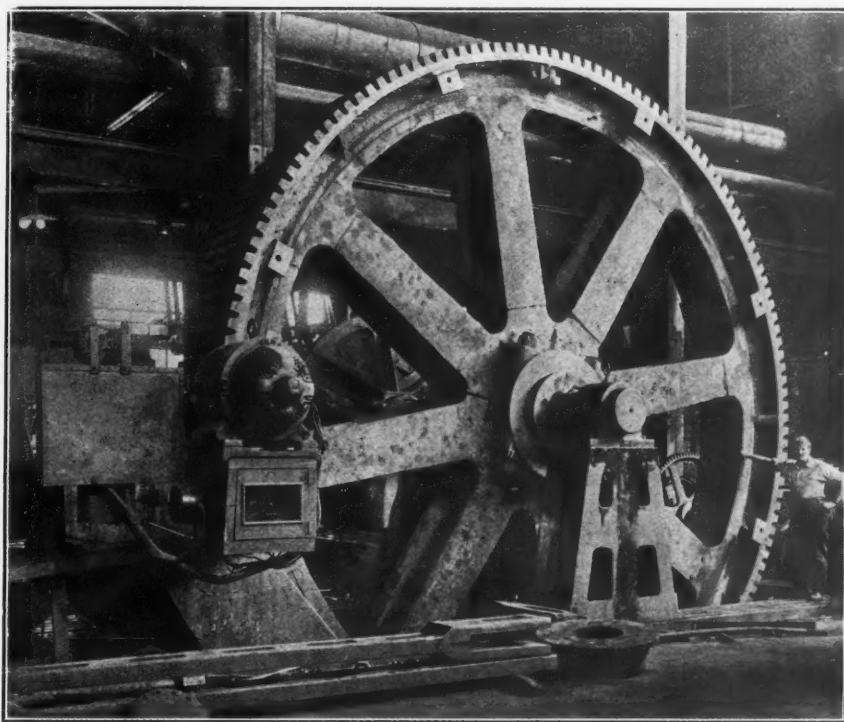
Large Gear and Special Planer used for cutting the Teeth—Outer Sections of Rim were shifted after Teeth were cut to stagger the Teeth as shown in Fig. 1
